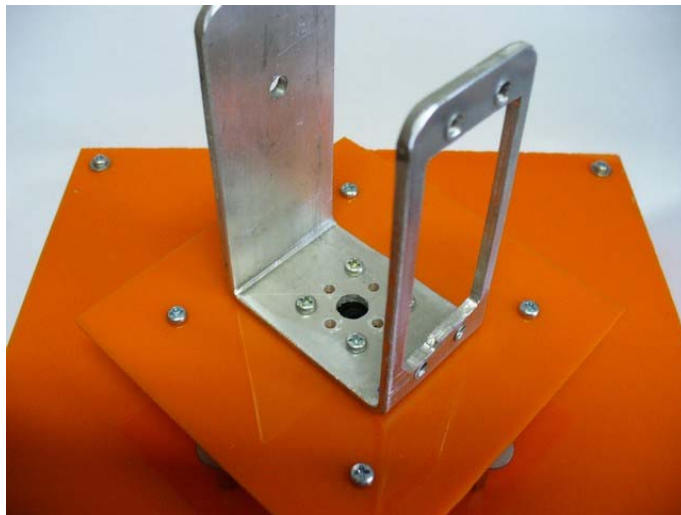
The horn set piece of the servo motor #1 is inserted to its motor.
